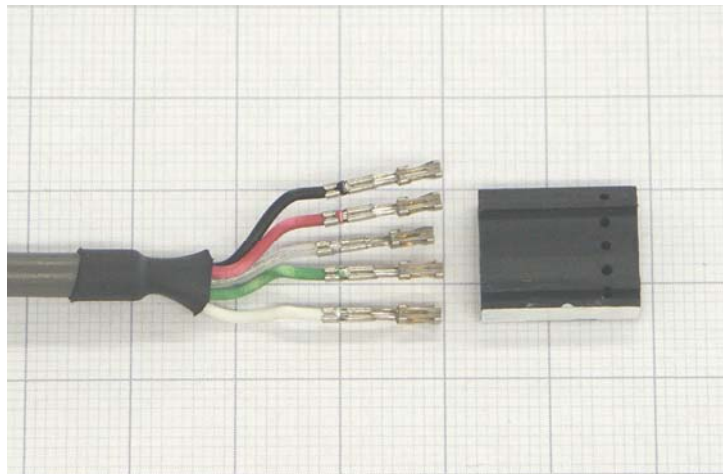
Valve-to-control module cable (note white marker stripe on the side of the black Molex connector).
